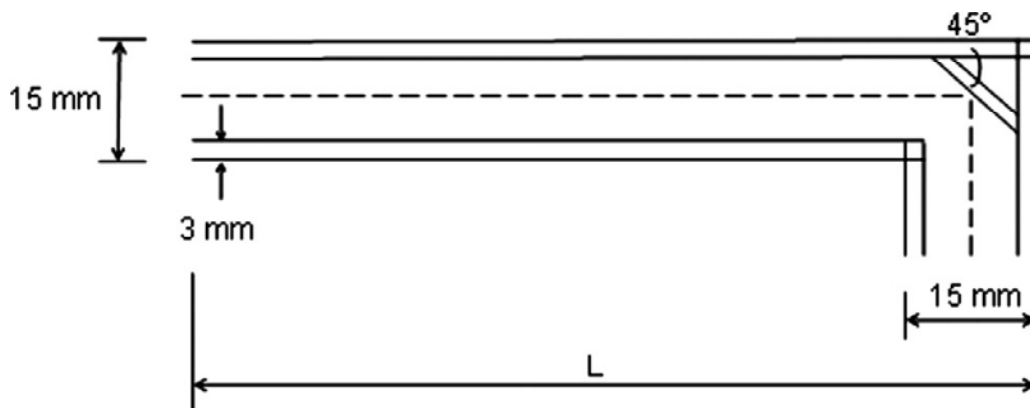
Longitudinal section of one light –pipe (18).
